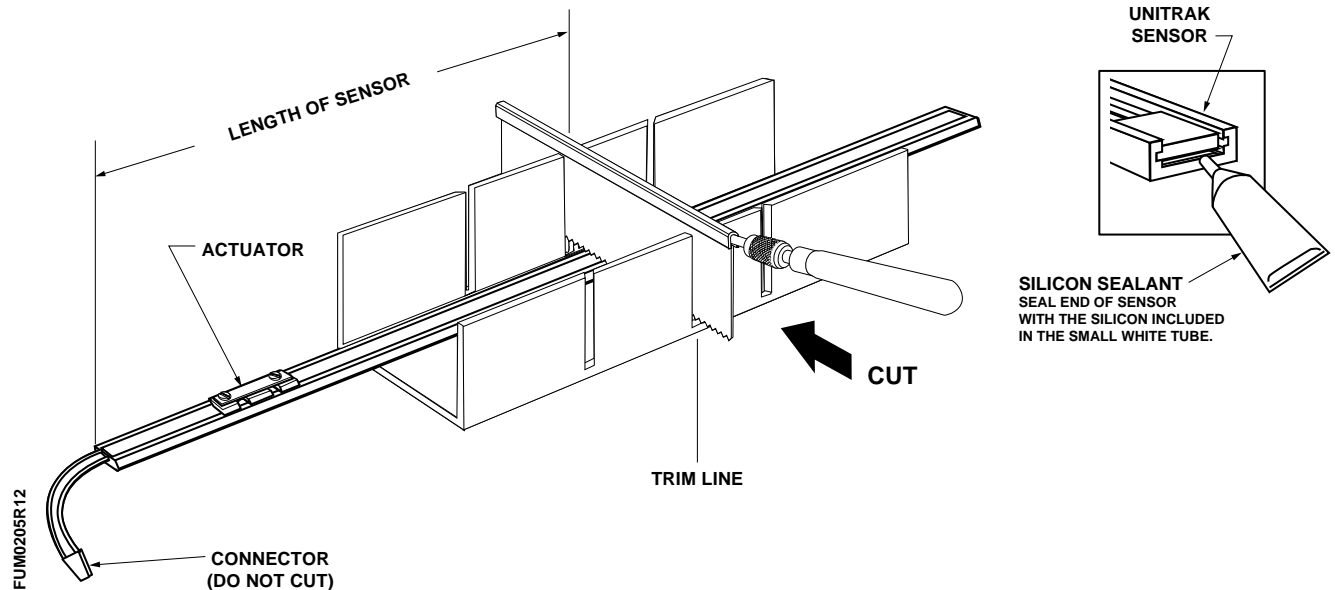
Cutting UniTrak® Sensor Using the Trim Tool Kit.
